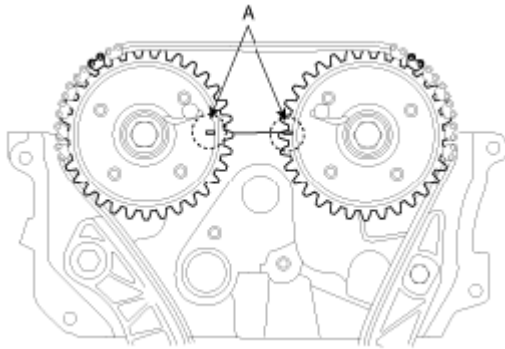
Identifying Mark Of Camshaft Timing Sprockets
